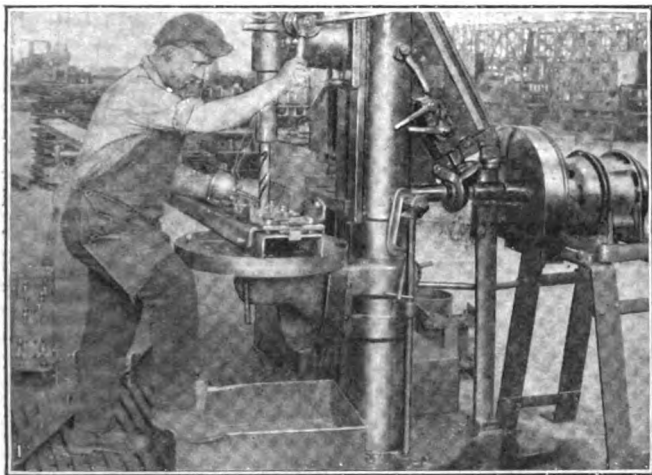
DRILLING THE FRAME. FIG. 2. THE DRILLING FIXTURE
